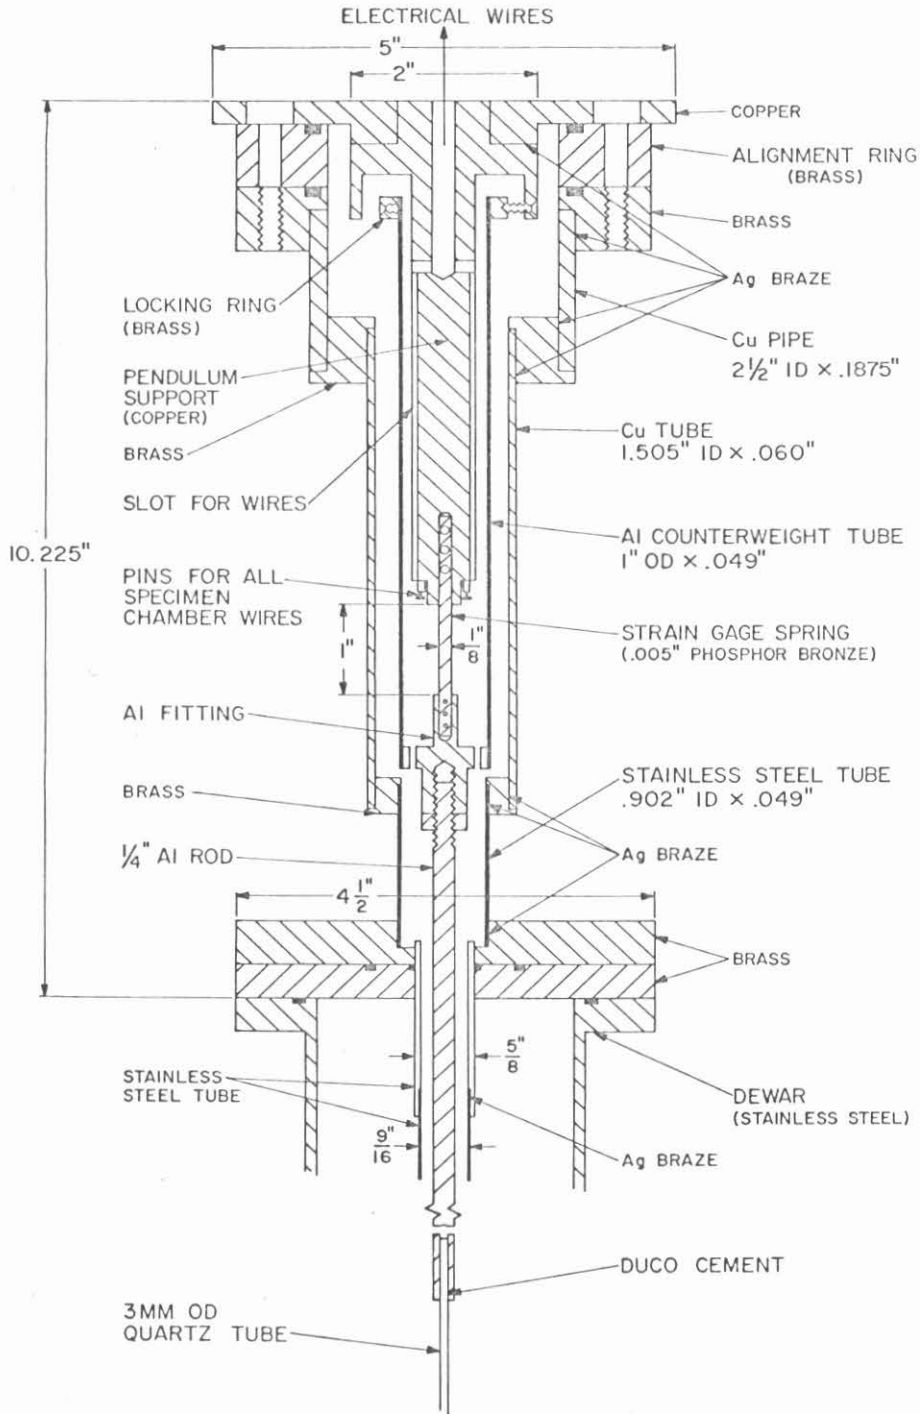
Drawing of upper section of Pendulum, Pendulum Support, and Upper Specimen Chamber.
